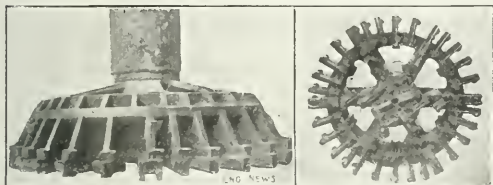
VIEWS OF ROUGH CASTING FOR HEAD OF KARN'S TUNNELING MACHINE
